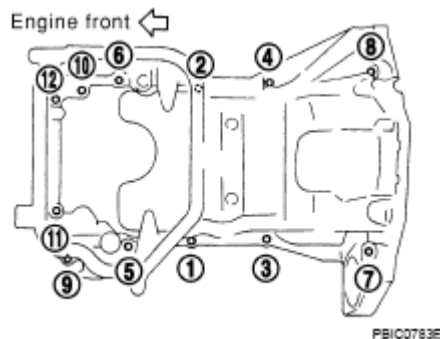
Identifying Oil Pan (Upper) Bolts Tightening Sequence
